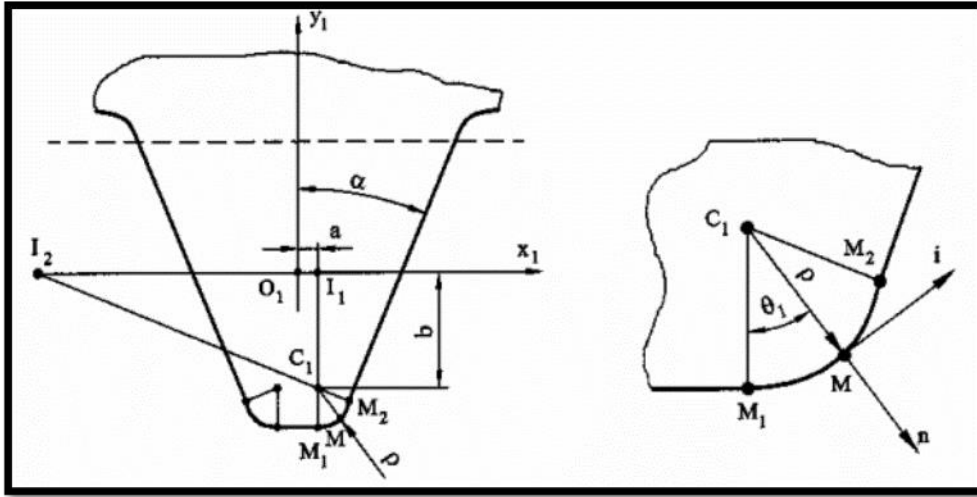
Cutting tool geometry and tool tip detail (Patil et al., 2019)
